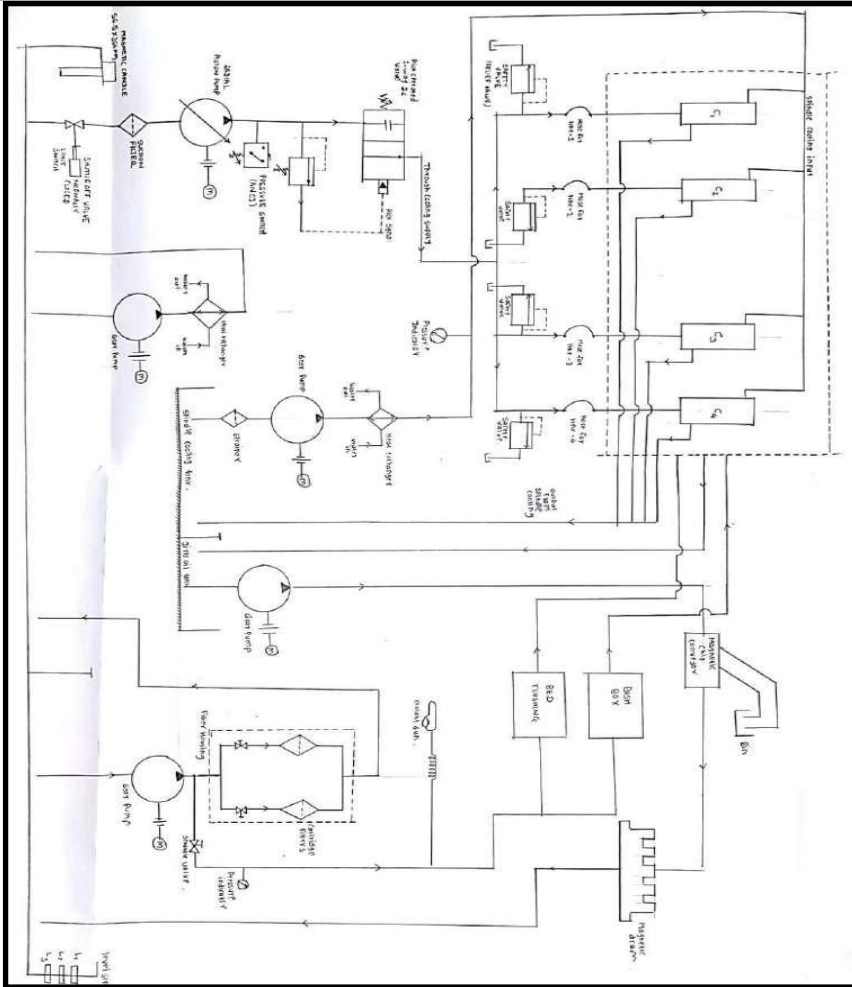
Detailed circuit diagram for previous oil supply unit setup for Kennametal machine
